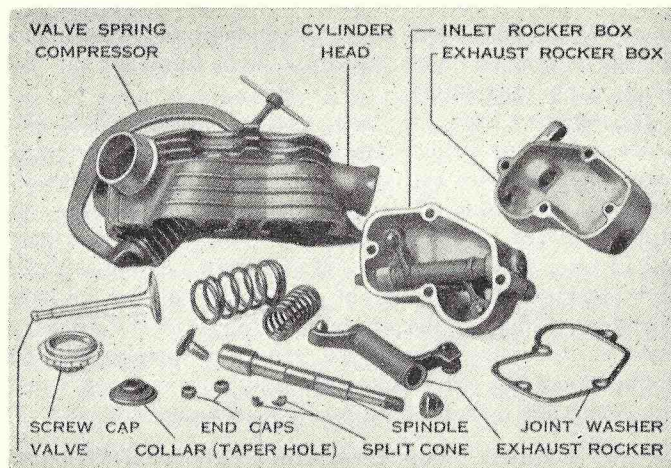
CYLINDER-HEAD AND ROCKER-BOX ASSEMBLY FOR 1938–59 SINGLE-CYLINDER O.H.V. MODELS.
